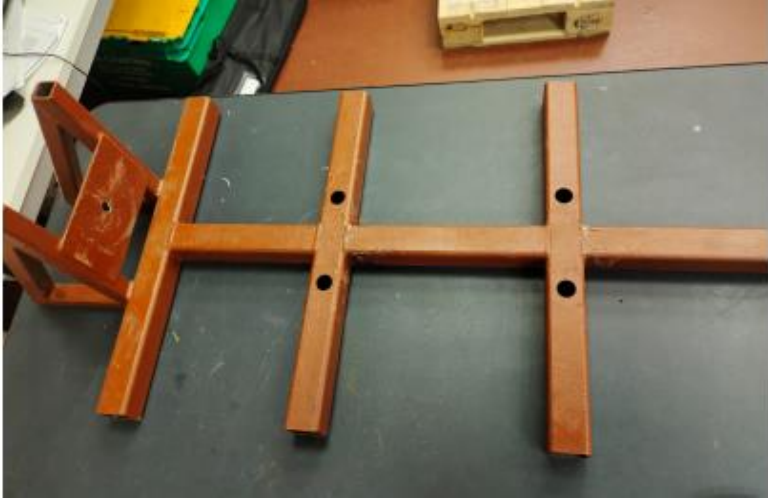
Stainless steel welded Test stand. SOURCE: Own
